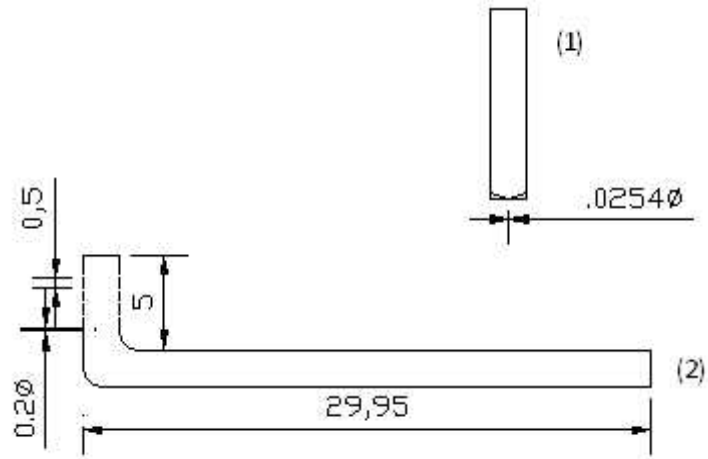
(1) Dimensions of injector (in millimeter) (2) Dimensions of pipe inside reactor to get out vapor methanol (in millimeter)
